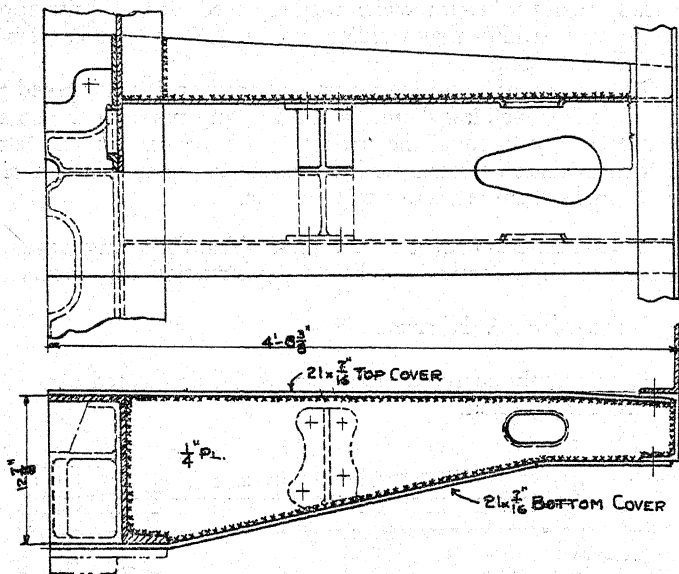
Commonly accepted method of replacing riveted construction with welded construction.
